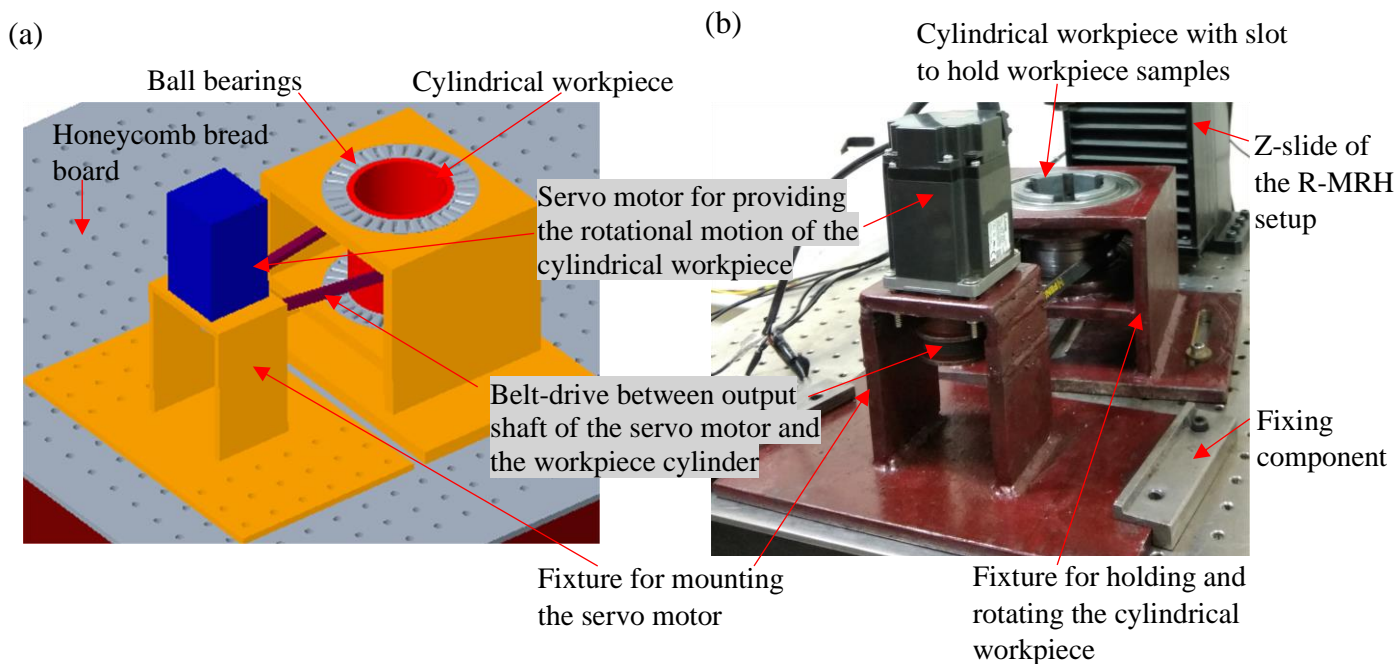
(a) Three-dimensional CAD model of complete fixture and (b) photograph of the complete fabricated fixture used for holding and rotating the cylindrical workpieces during its inner surface finishing in the R-MRH process.
